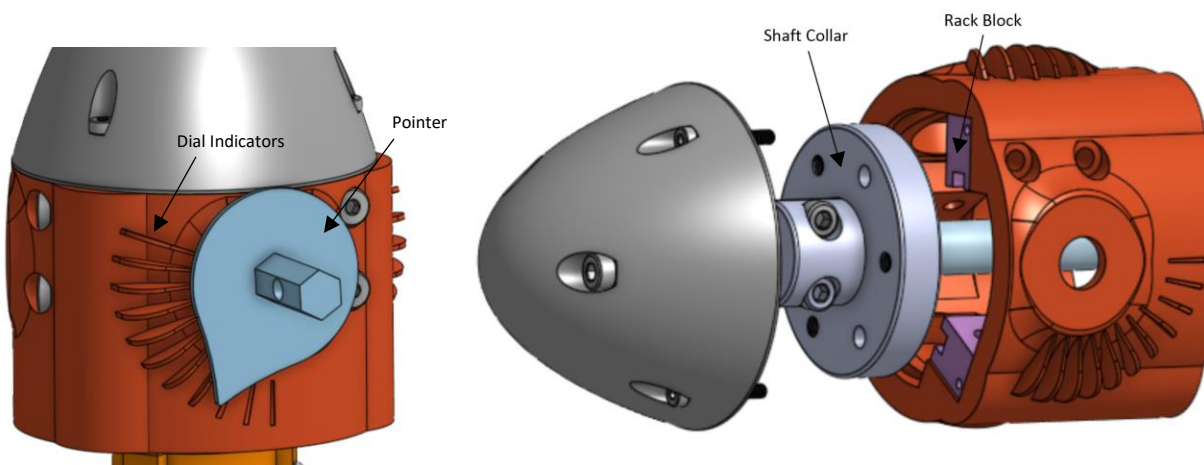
Dial indicator and pointer (left) and exploded hub and nose cone assembly (right)
